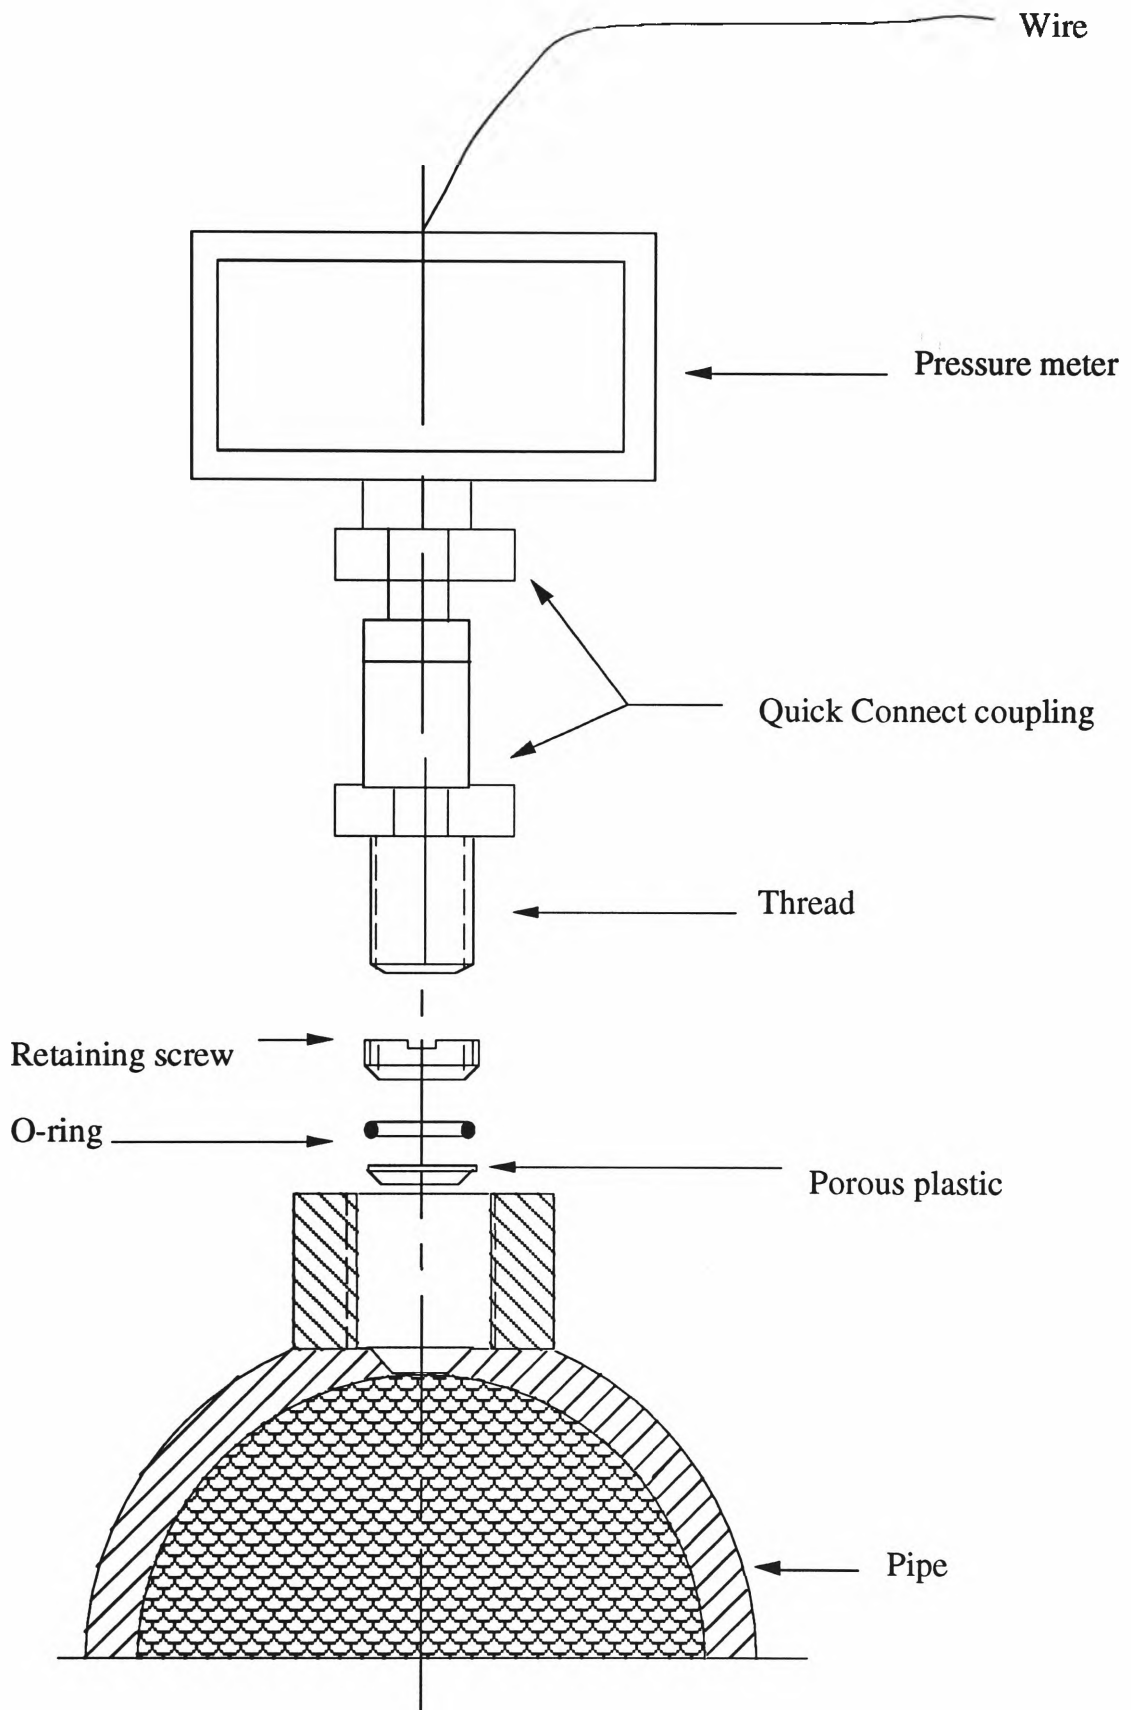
Exploded view of a typical pressure meter tapping location
